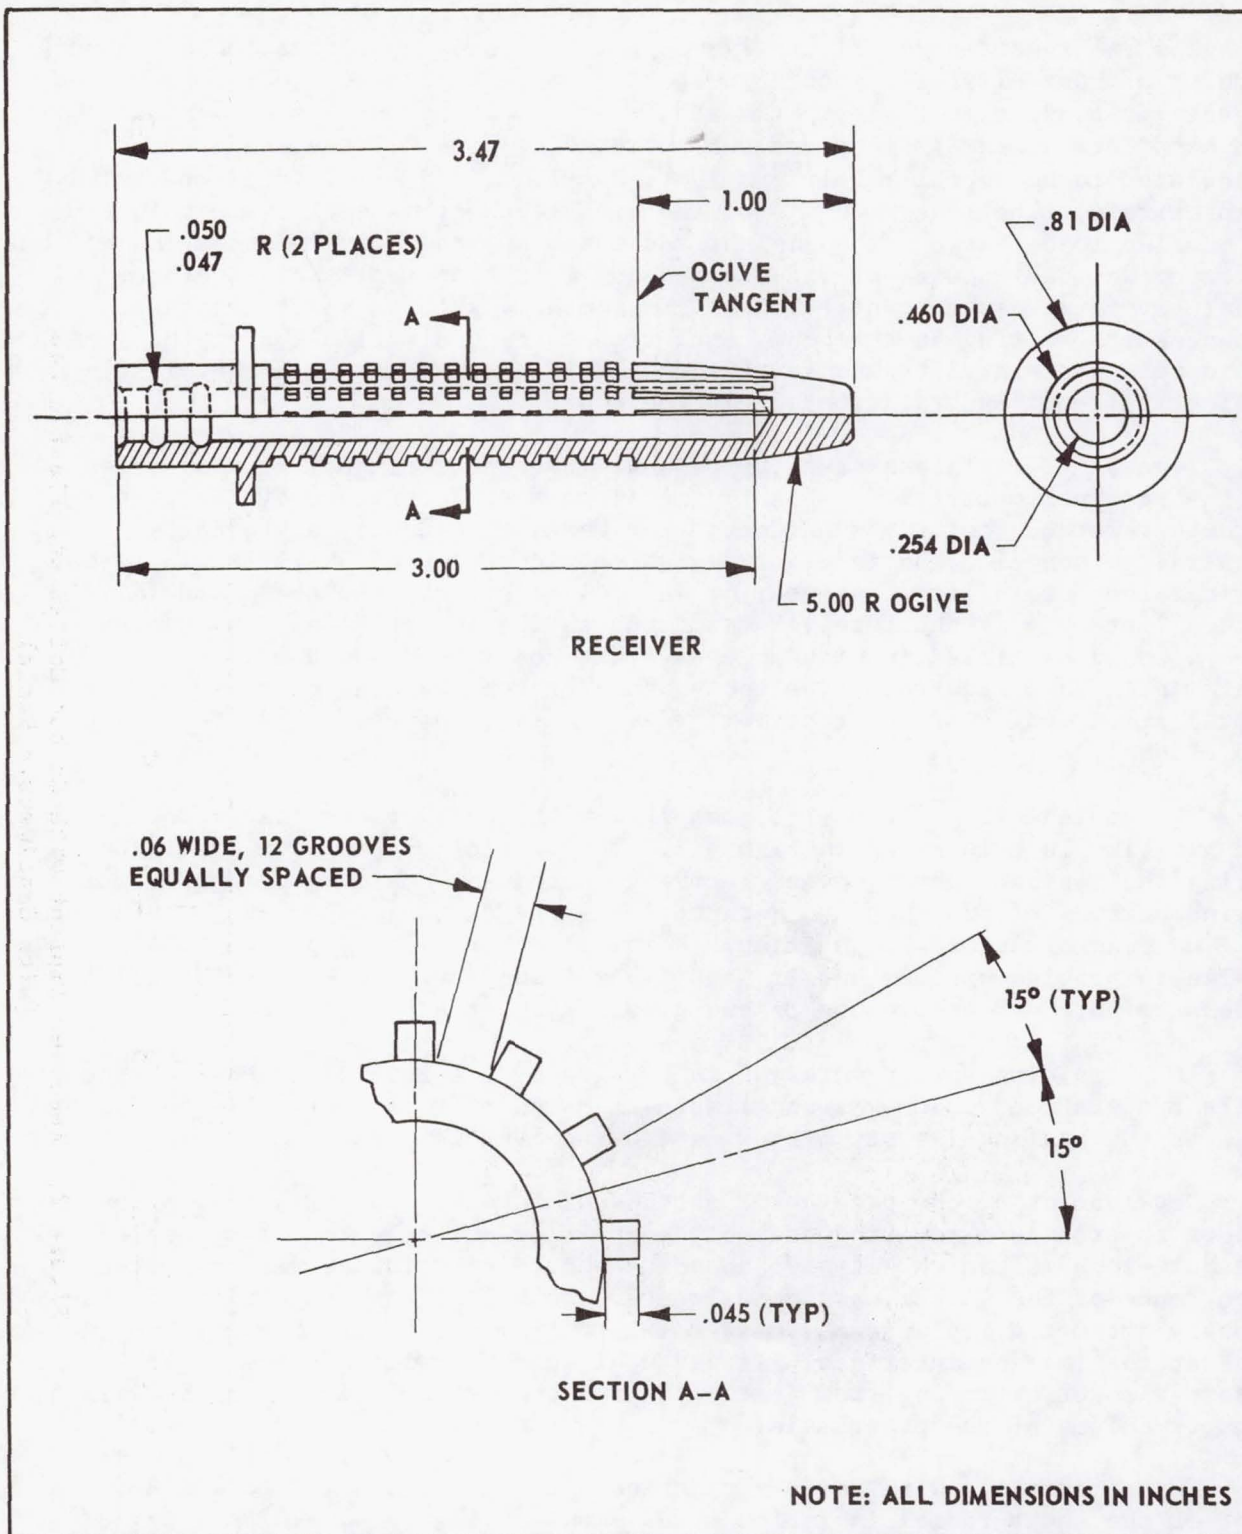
Receiver Implant Design (Extracted from Manufacturing Drawing)
